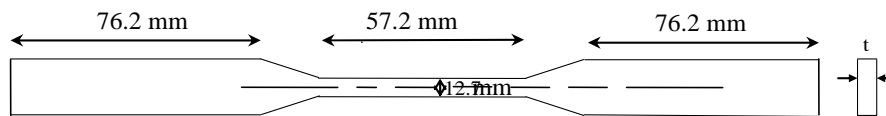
Dimensions of tensile coupon test specimen. (Ref: ASTM A370)
